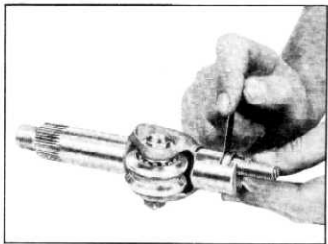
Checking Sector Shaft Lash Adjuster End Clearance
